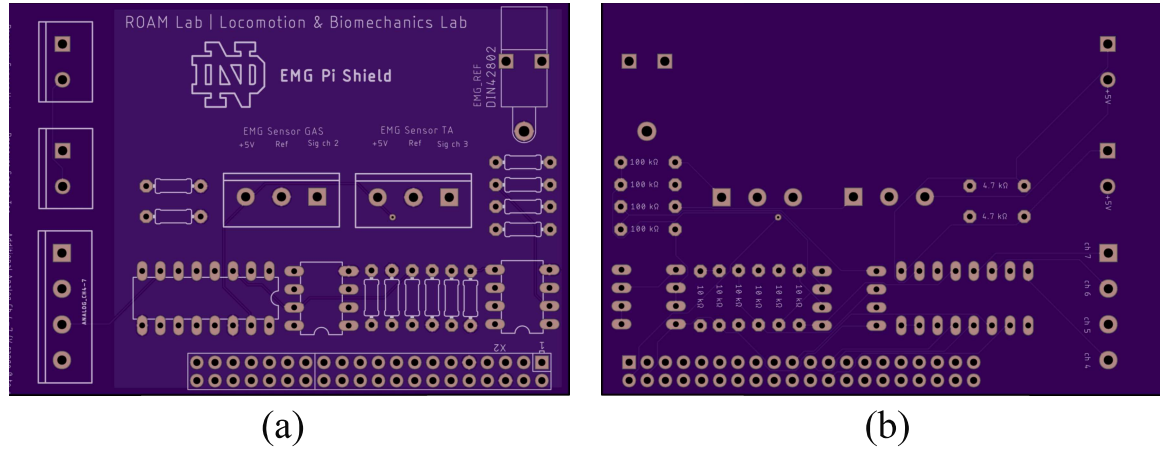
The unpopulated layout of the EMG Pi Shield on top (a) and bottom (b).
